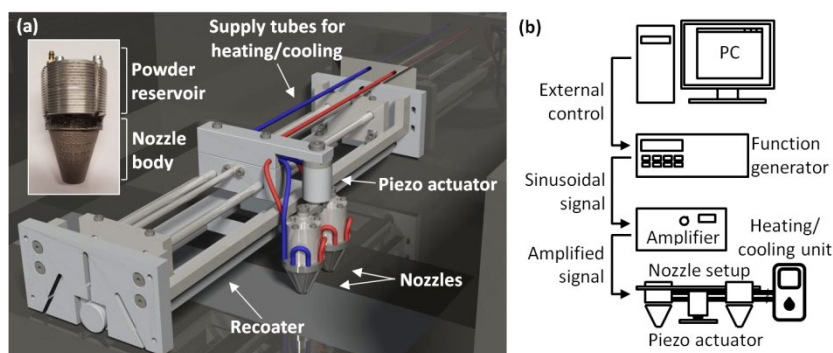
(a) Recoating unit consisting of two attached vibrational nozzles, a piezo actuator and supply tubes for heating/cooling liquids, Inlet: photograph of an additively manufactured metal nozzle; (b) scheme of the nozzle control
